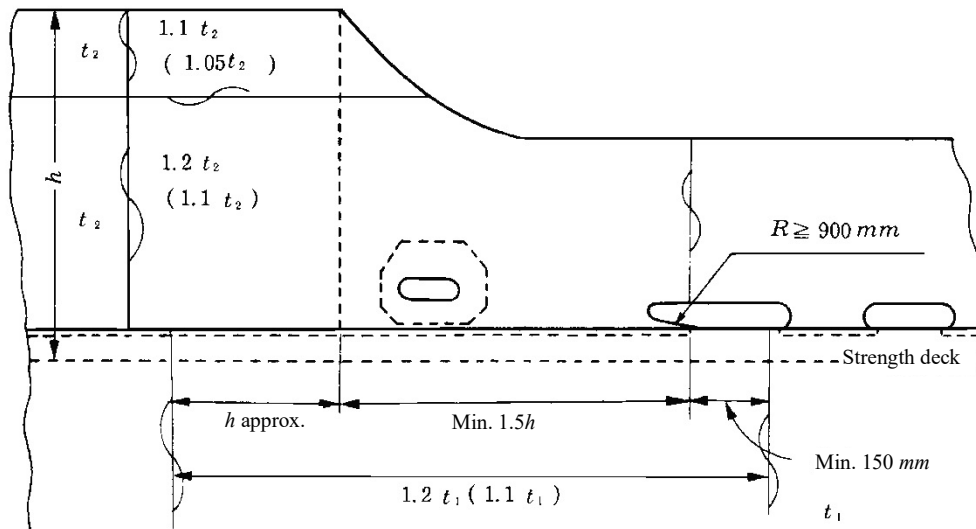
Construction of Superstructure End (Where Expansion Joint is Installed)
